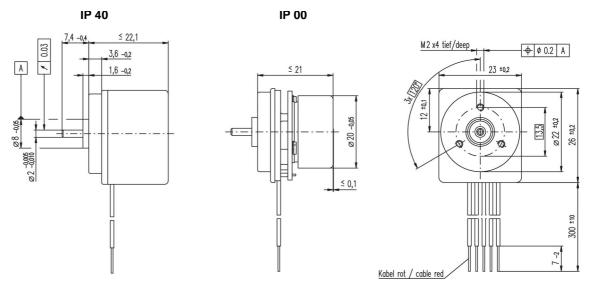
5 Watt version – Dimensional drawing [mm]
